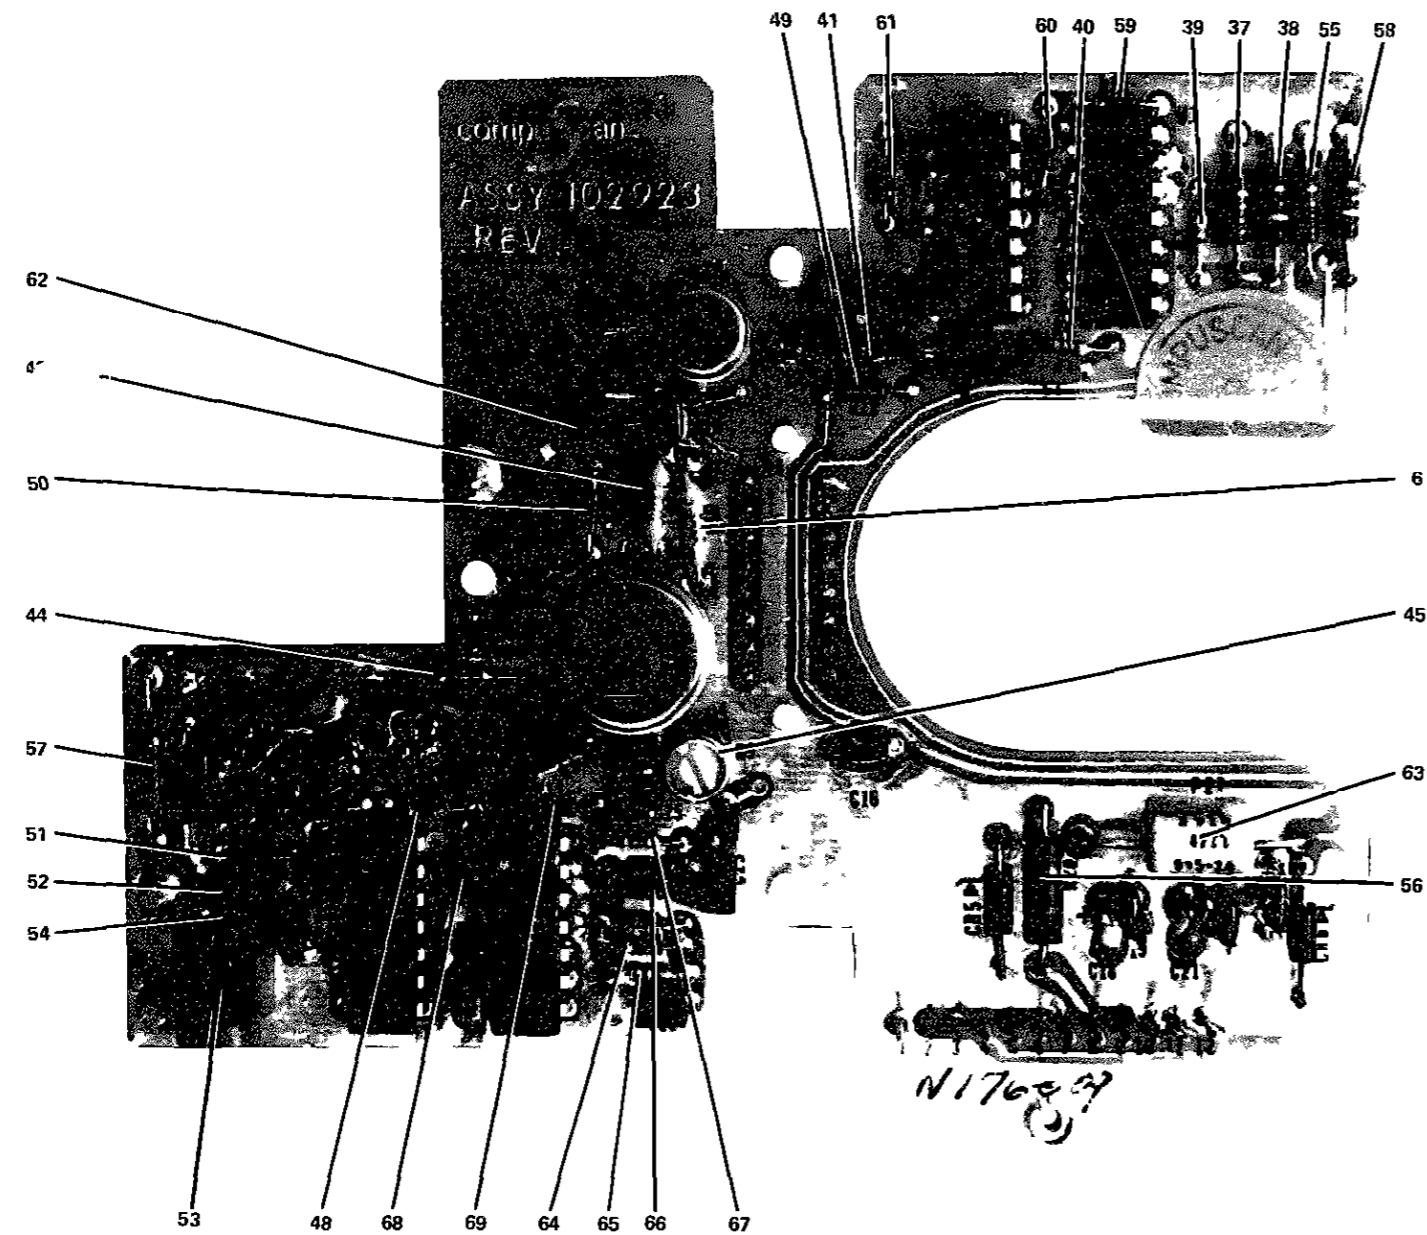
Read Head Analog Circuit Card Assembly 1A7A2A2A1 (Sheet 2 of 3)
